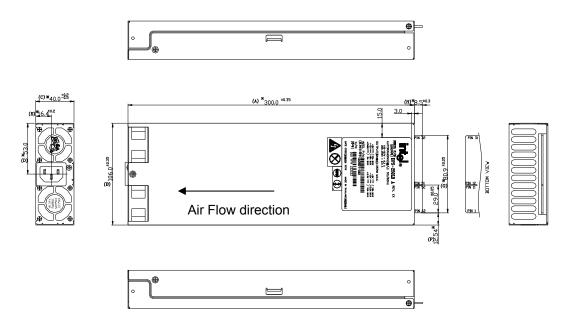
Power Subsystem Enclosure Outline Drawing
